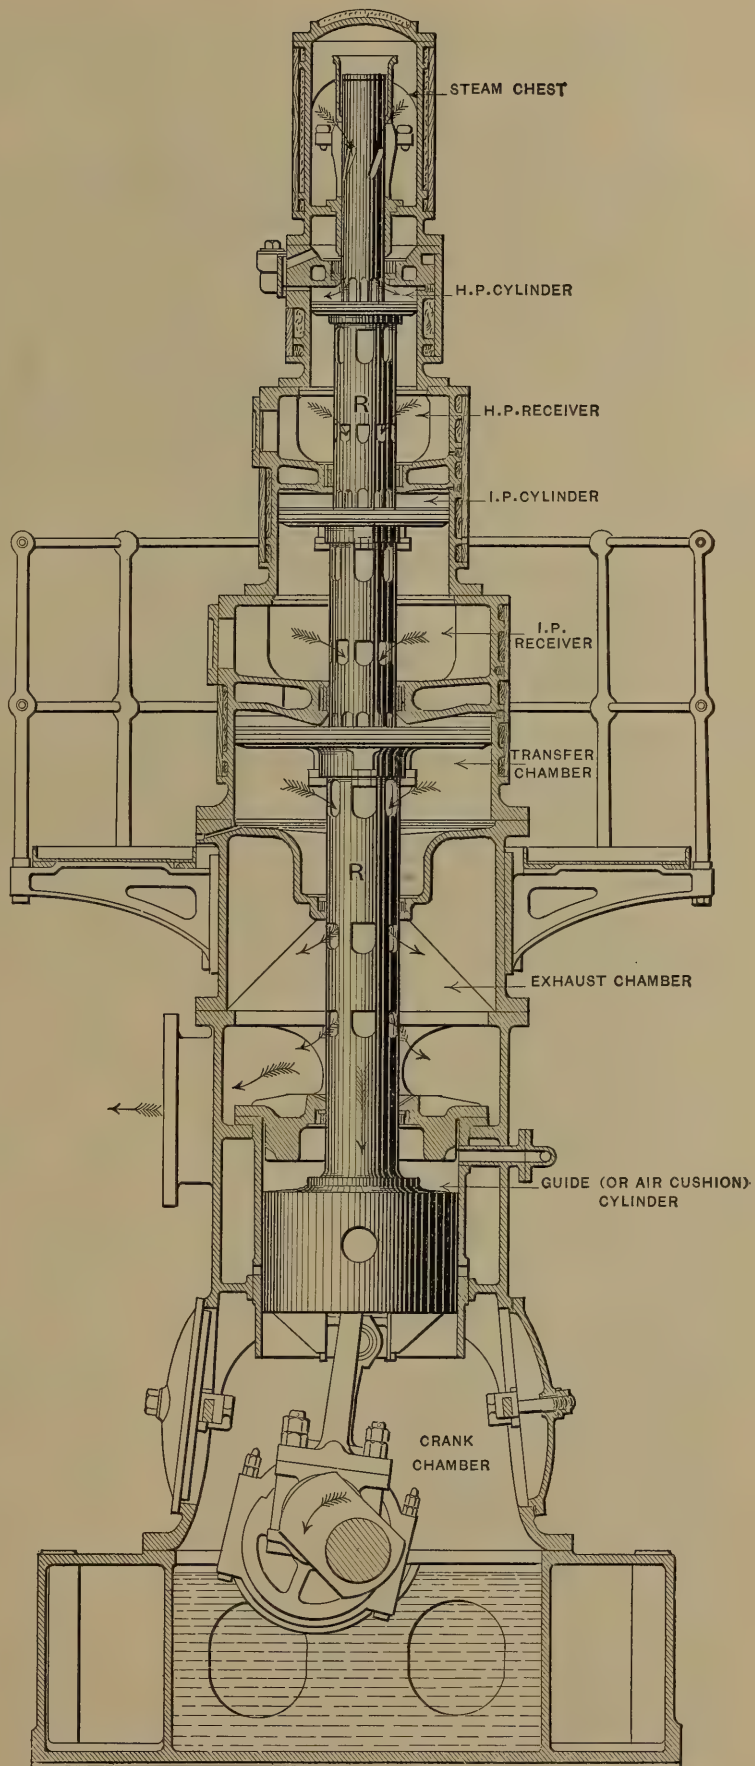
SECTION OF A TRIPLE-EXPANSION WILLANS ENGINE
